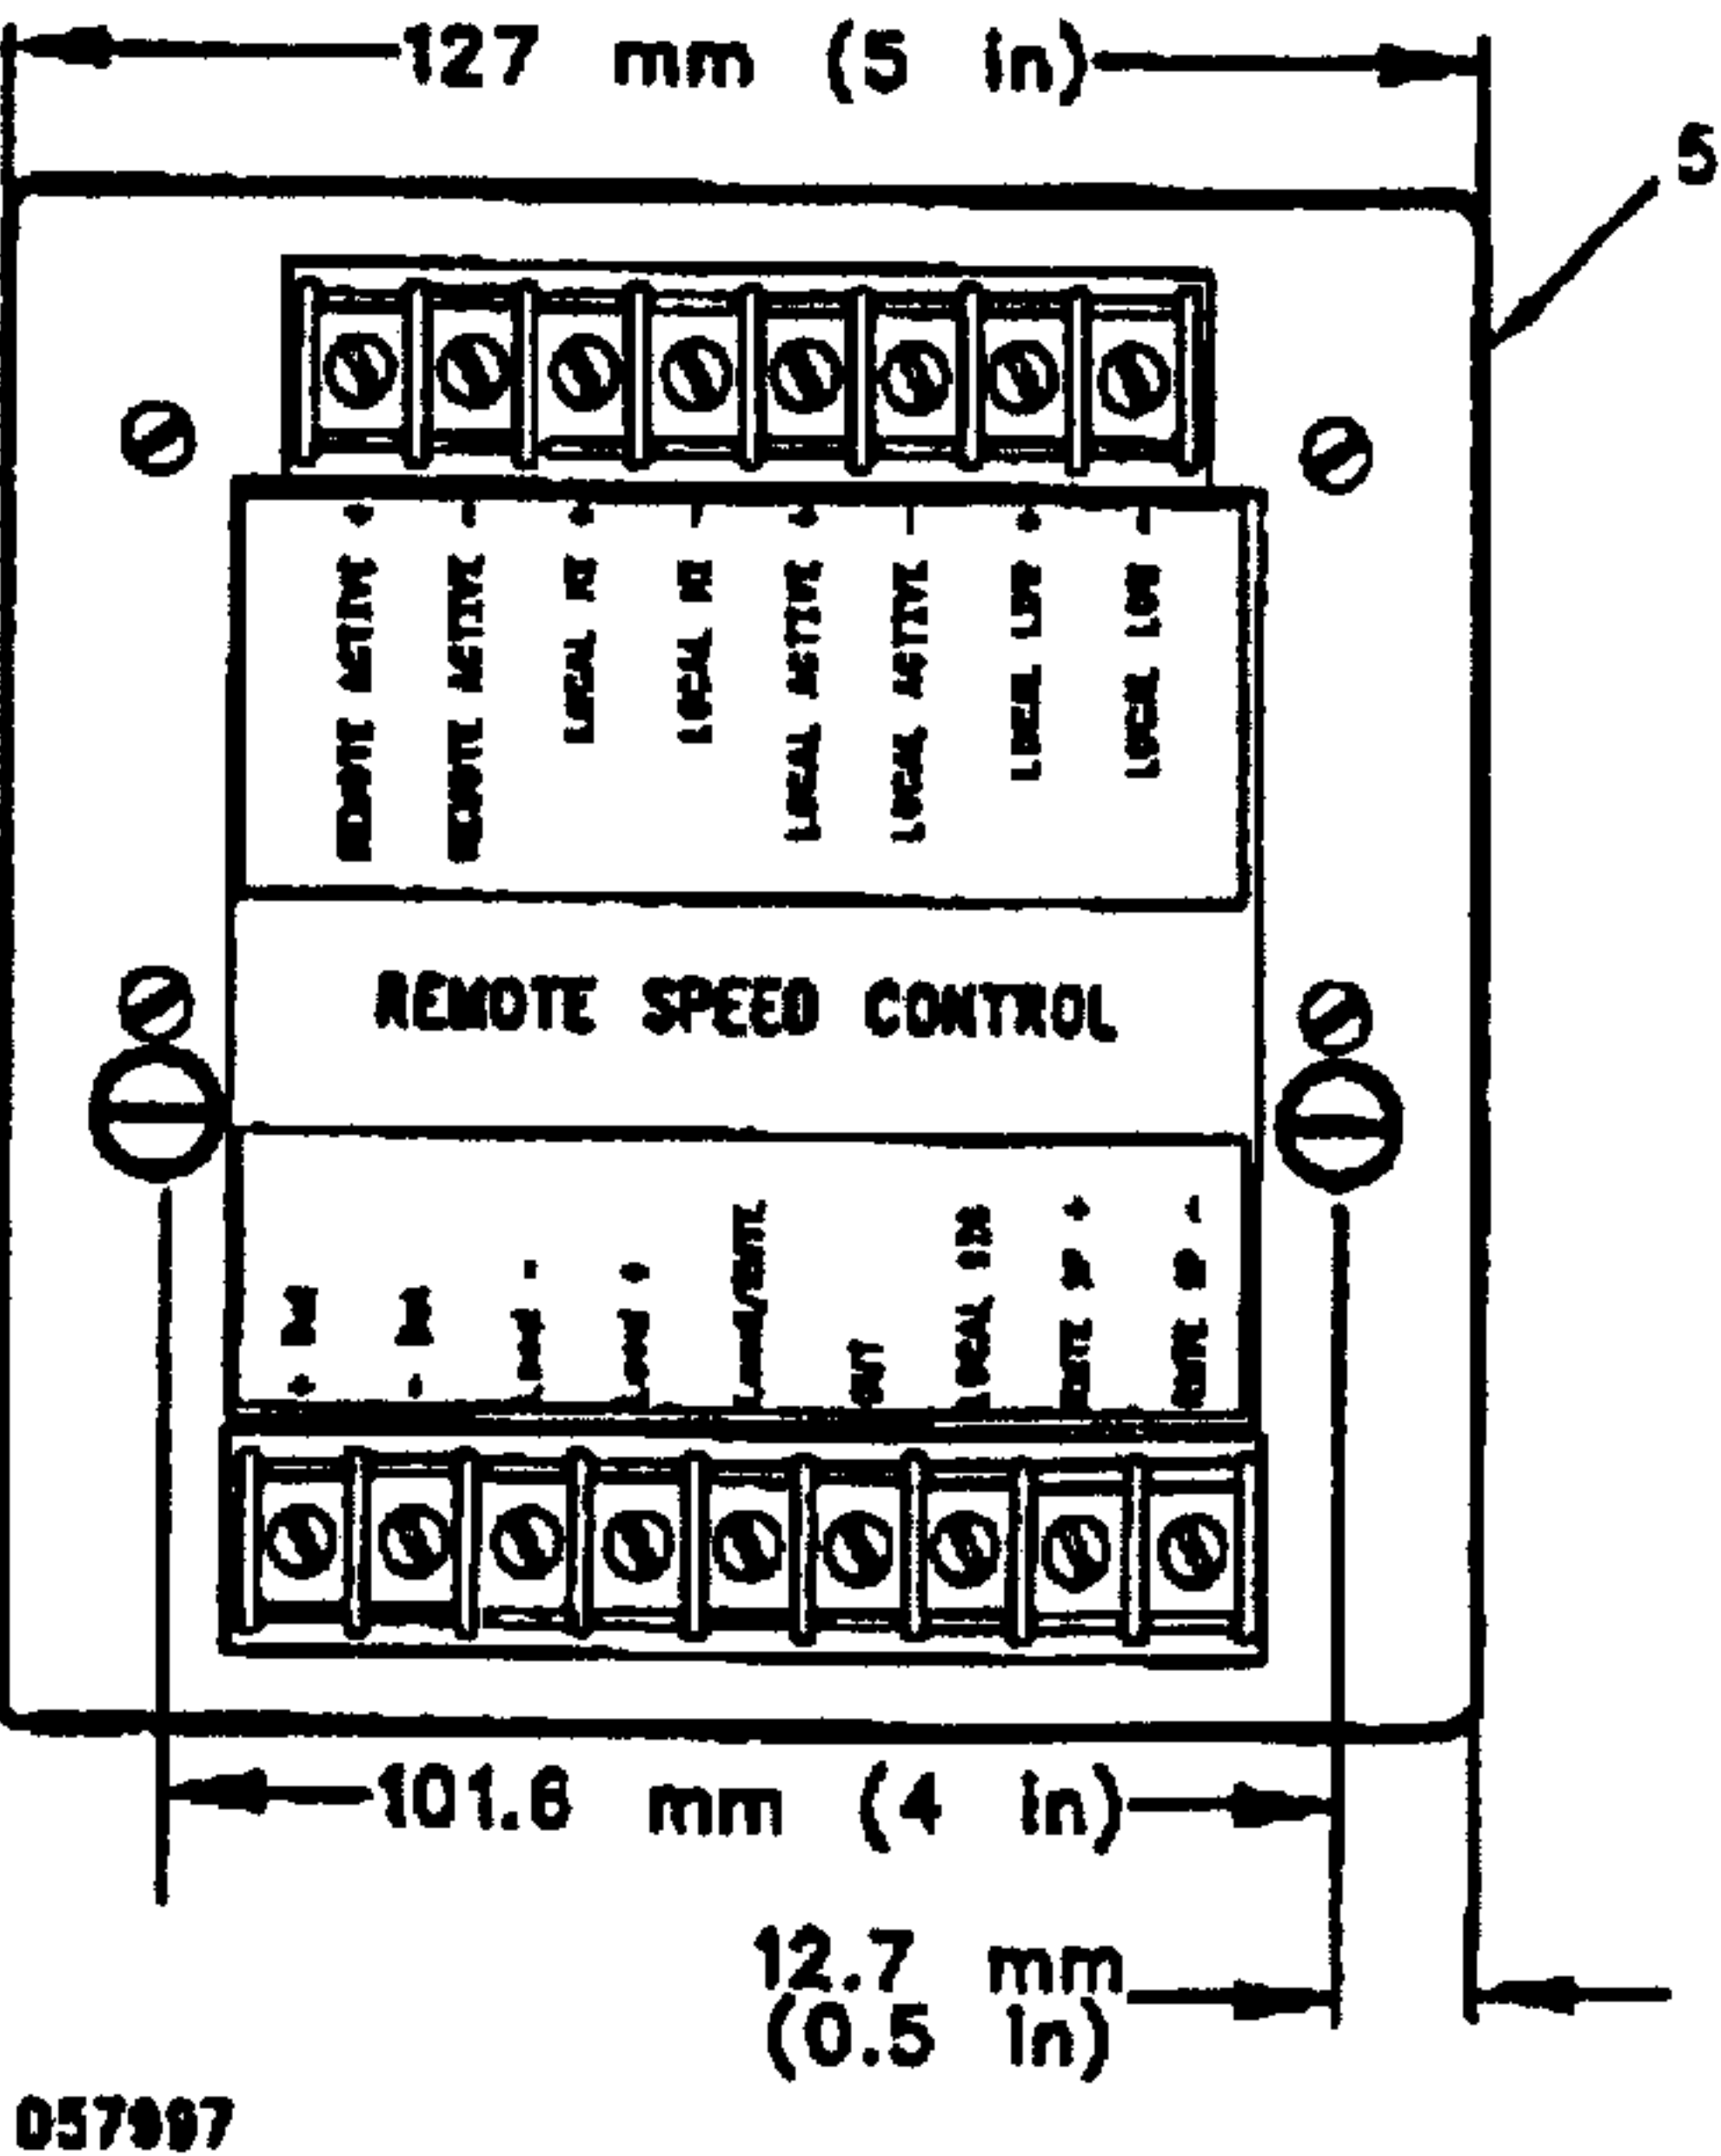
Remote Speed Control On Top Of Plate Assembly: (5) 125-5486 Control Group.
